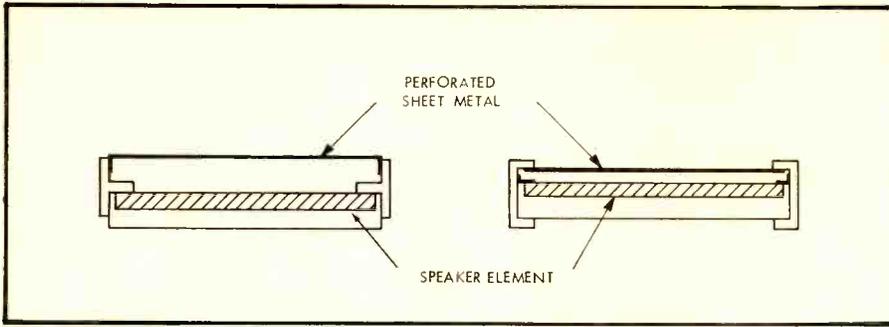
Completed speaker element must be mounted in a protective enclosure.
